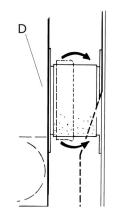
Mounting the operating springs on the hose reel drum
